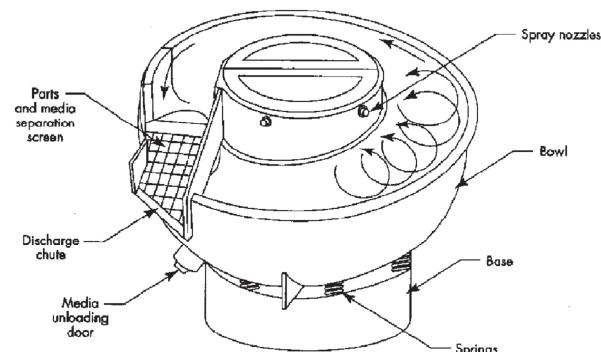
Automated continuous-feed vibratory finishing machine with screen for separating parts and media, and conveyor and chutes for returning media to the machine (courtesy: SME)
